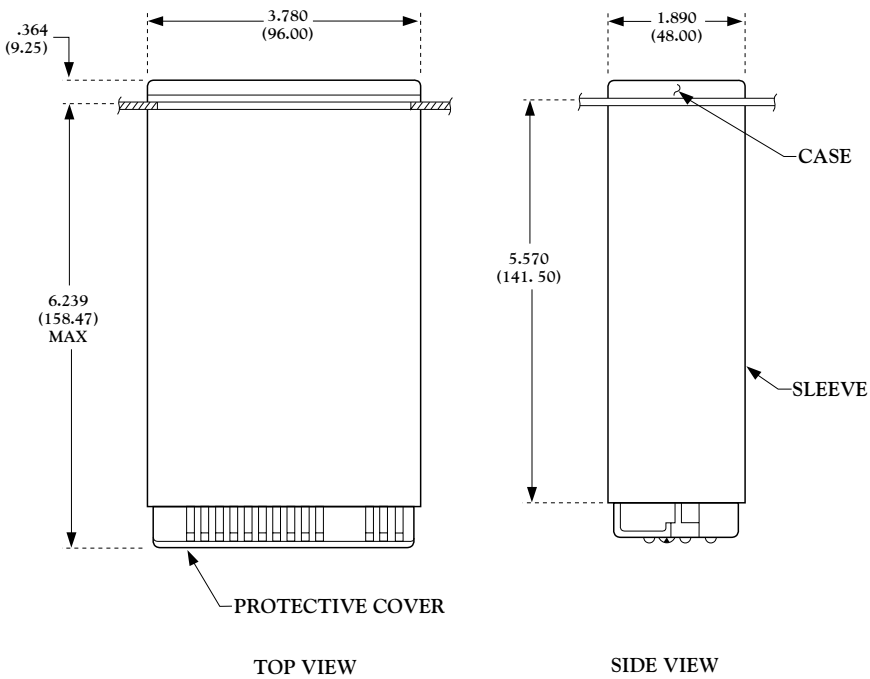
Dimensions for Meter in Optional ("OH") Housing.
